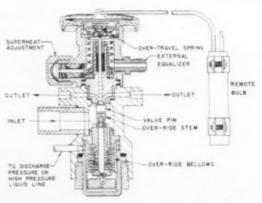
Multi-outlet thermo expansion valve with discharge pressure over-ride modulating feature.
